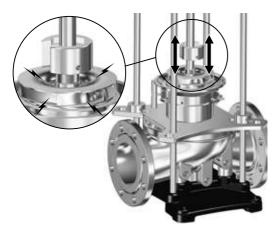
Fixating the impeller (49 or 49a) to the pump shaft (51) with service tool C
